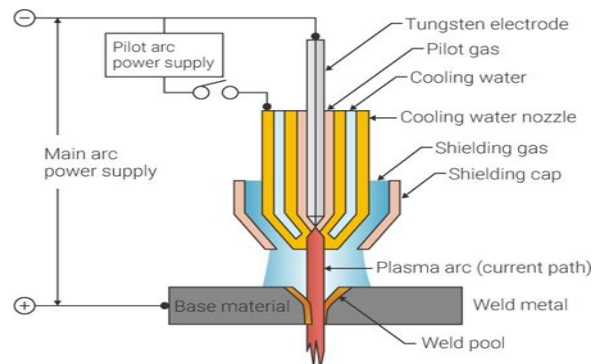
Schematic diagram of Plasma Arc Welding
